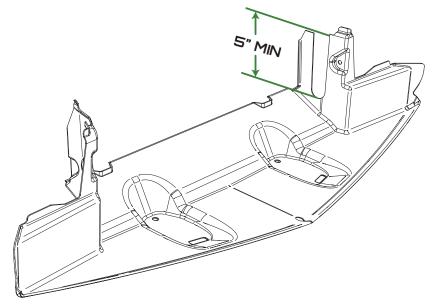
Trimmed Black Plastic Lower Radiator Shroud
